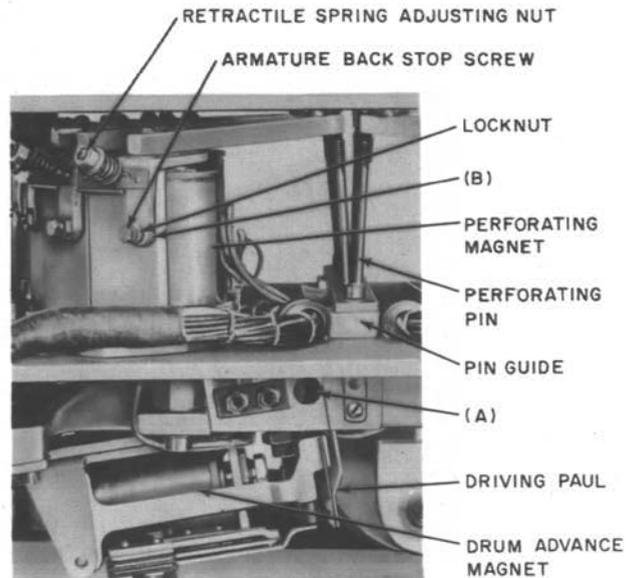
Drum Advance Mechanism and Cutter Assembly
